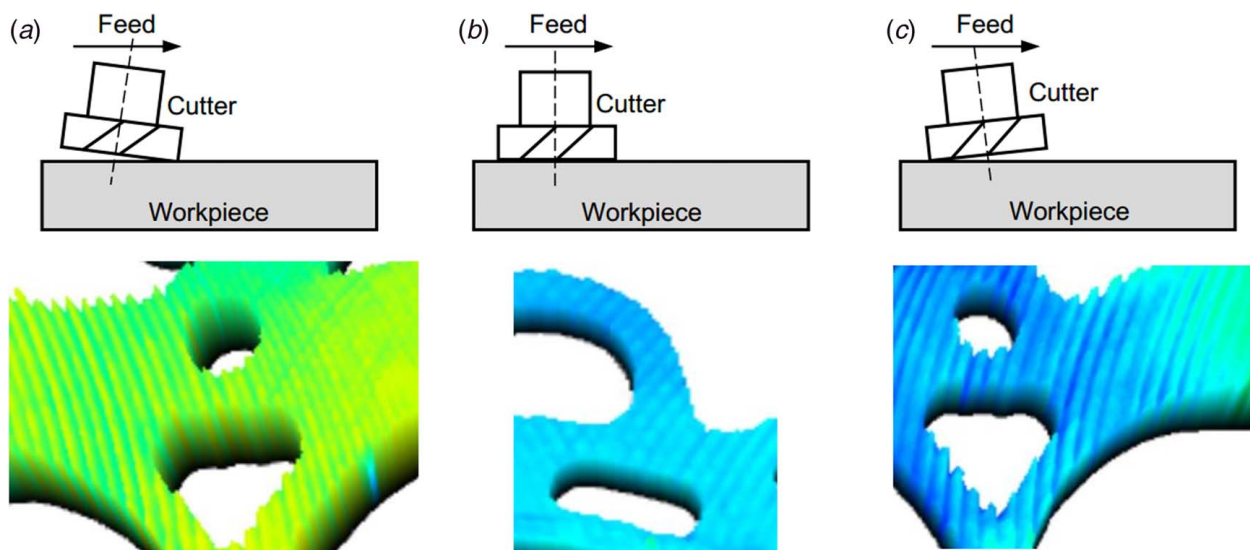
Typical surface texture with different kinds of tool marks: (a) unidirectional tool marks caused by positive inclination of spindle, (b) crisscross tool marks without spindle inclination, and (c) unidirectional tool marks caused by negative inclination of spindle
